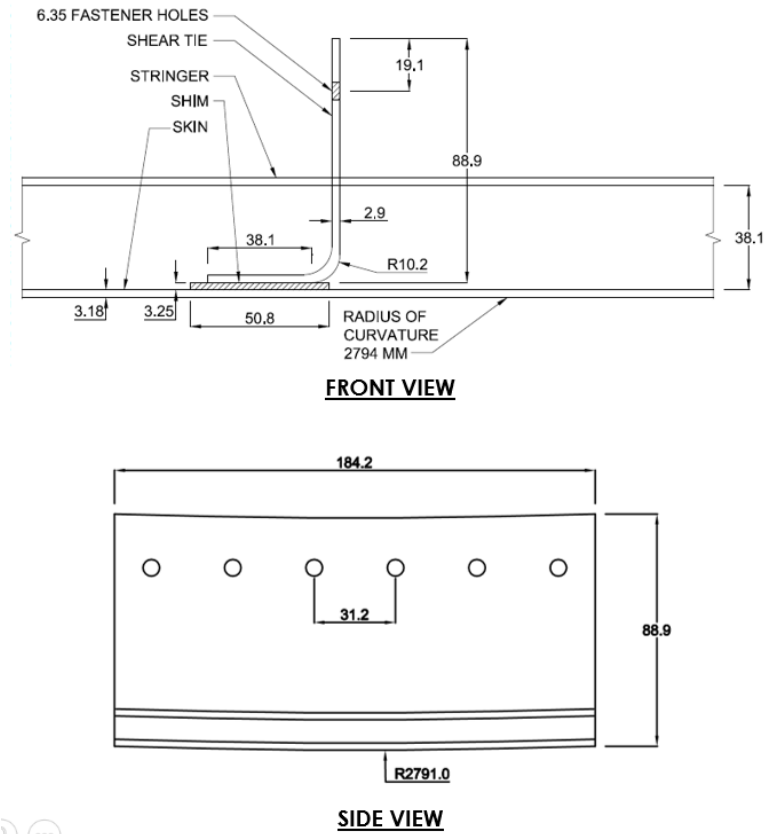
Shear Tie Geometry (All Dimensions in mm).
